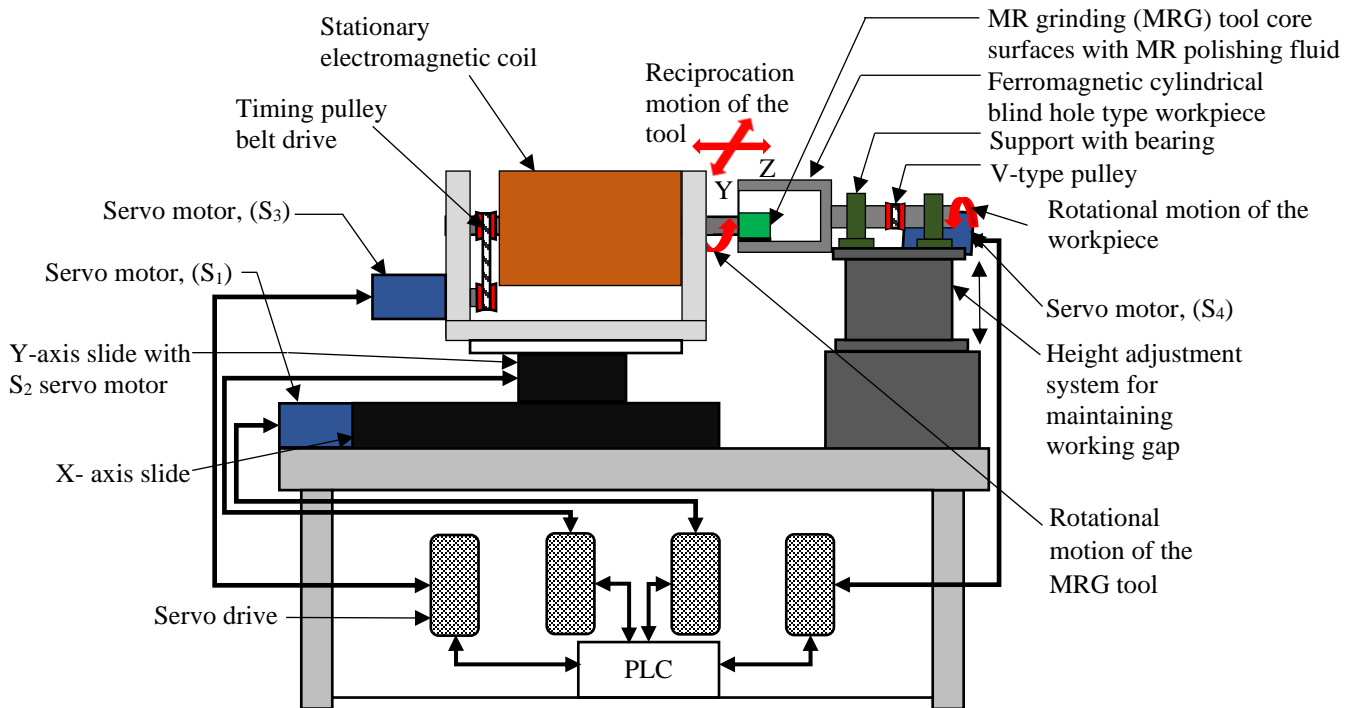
Schematic diagram of the magnetorheological grinding (MRG) tool while finishing the internal surfaces of the blind hole workpiece with the different controlled motions.
